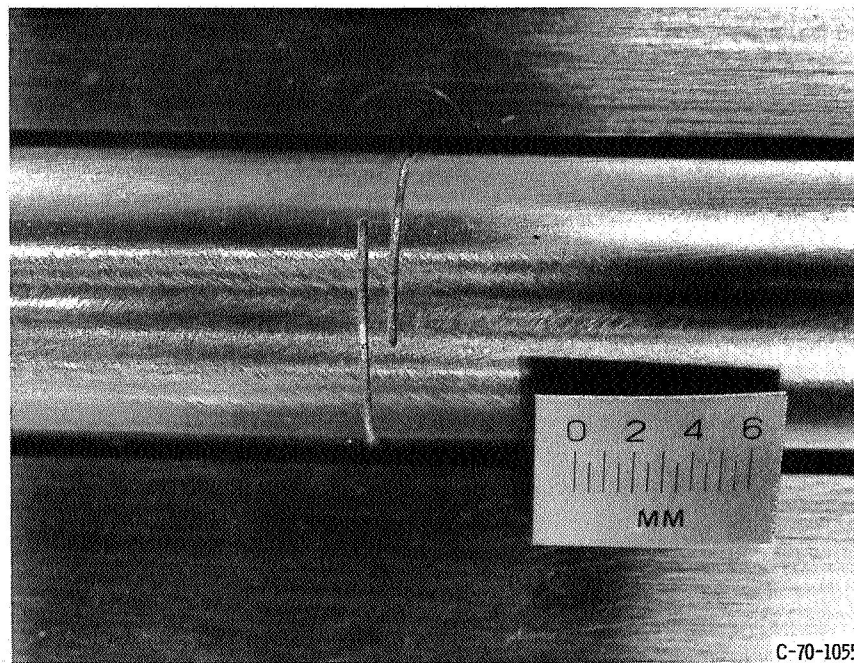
Enlarged view of center heat-flux-meter tube shell, showing thermocouple slots.
